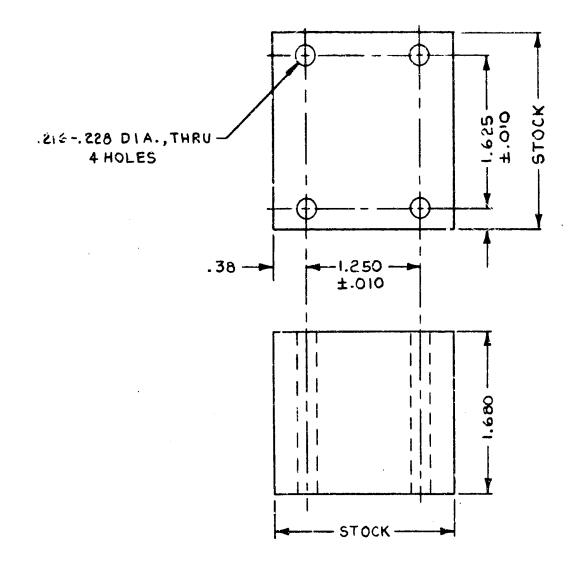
Sideband Generator Assembly (A2367370) (Sheet 2 of 3)
